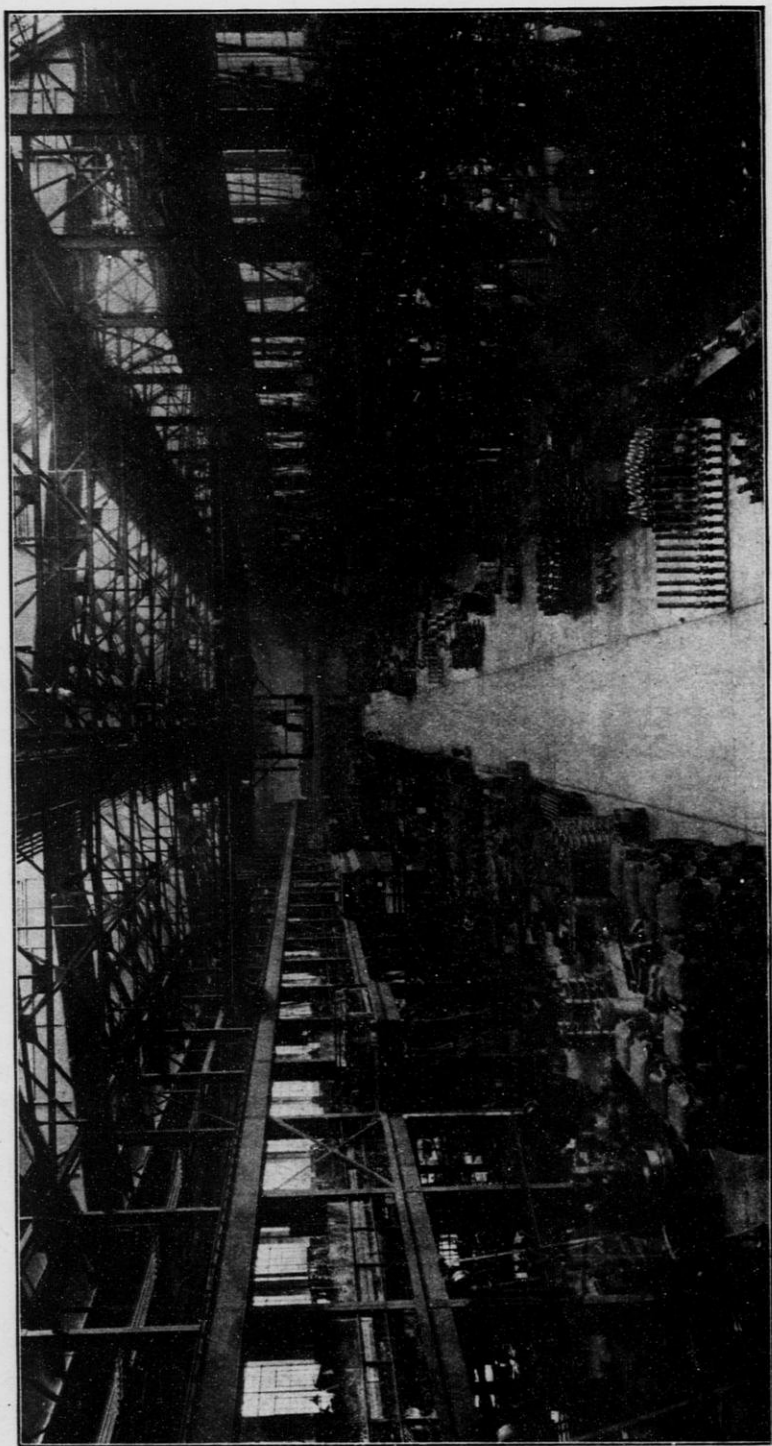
Interior view of the great machine shop of the south plant of the J. I. Case Threshing Machine Company, Racine.
